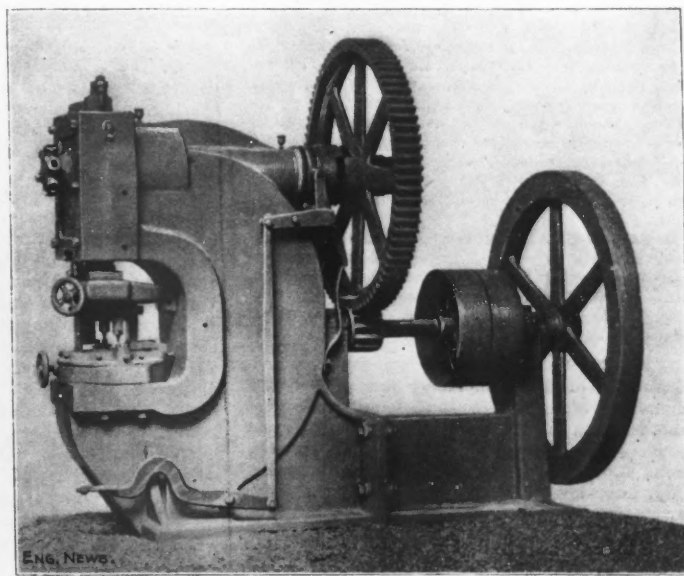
TURRET HEAD PUNCHING MACHINE.
